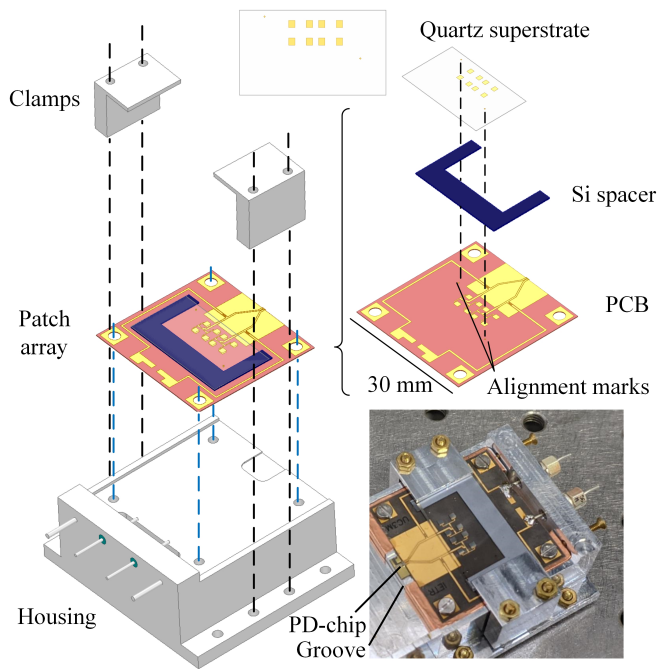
Top: exploded view of the assembled prototype, and bottom-right: photograph of the prototype.
